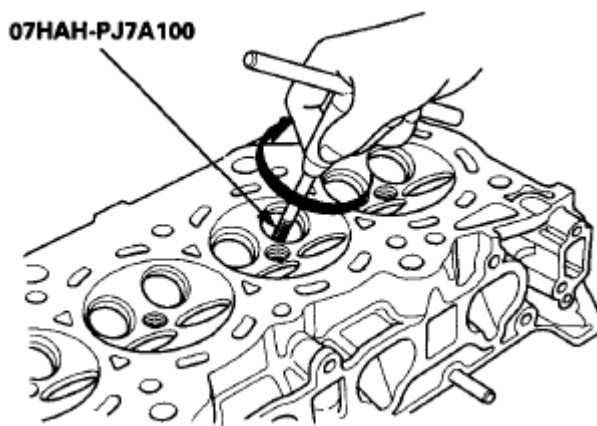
Rotating Reamer Clockwise To Full Length Of Valve Guide Bore
